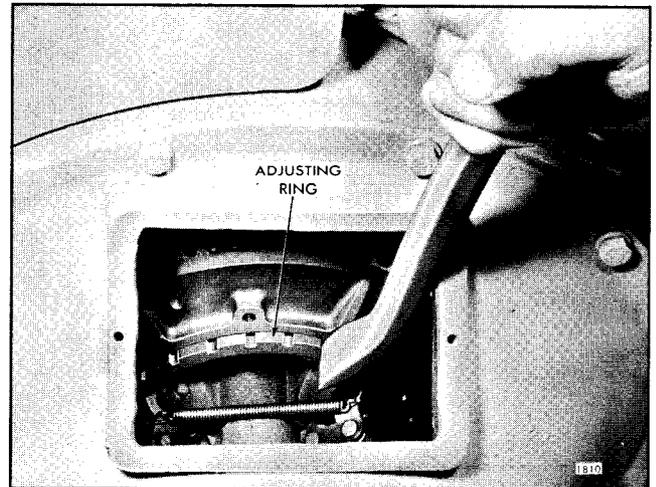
Adjusting 8, 10 or 11-1/2 Inch Diameter Power Take-Off Clutch
